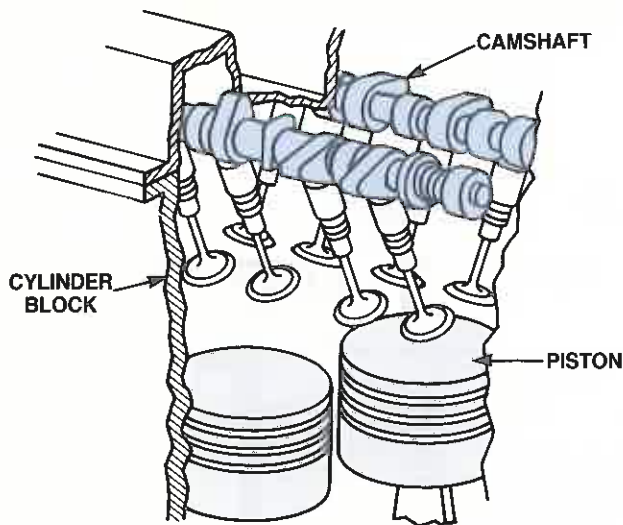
A dual overhead camshaft is used on some engines to operate the intake and exhaust valves.
